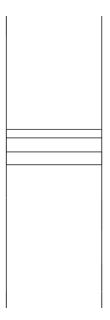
Top View of the Single Extruded Spur Gear Tooth
